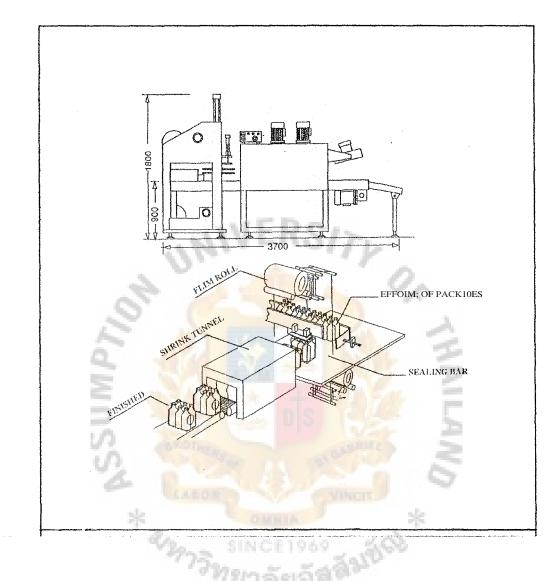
The Automatic Shrinking Film Wrapping Machine.
